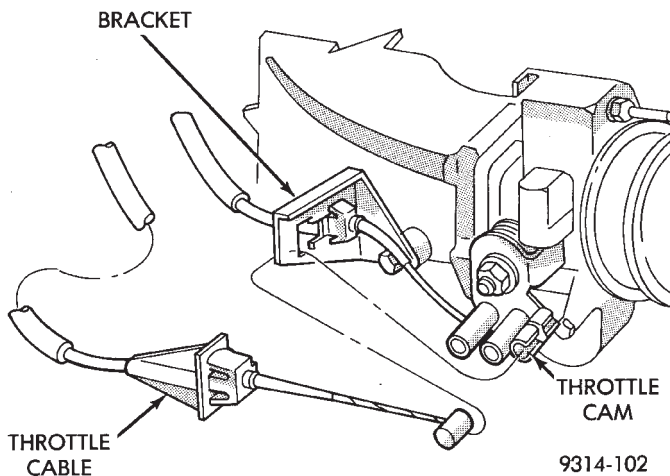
Throttle Cable Removal/Installation—3.3L Engine
